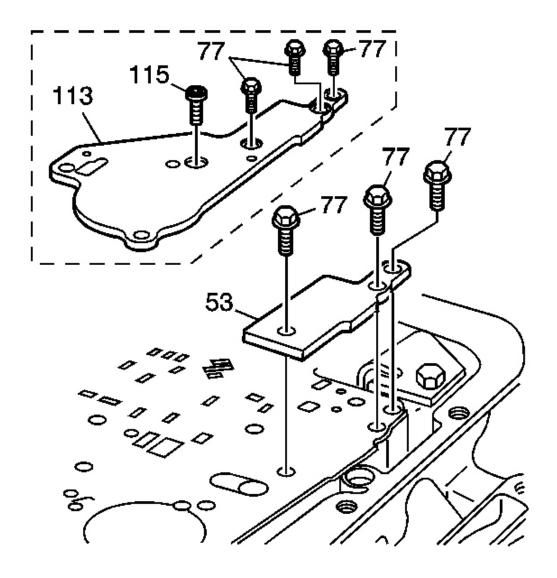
Aligning Valve Body Bonded Spacer Plate Courtesy of GENERAL MOTORS CORP.
